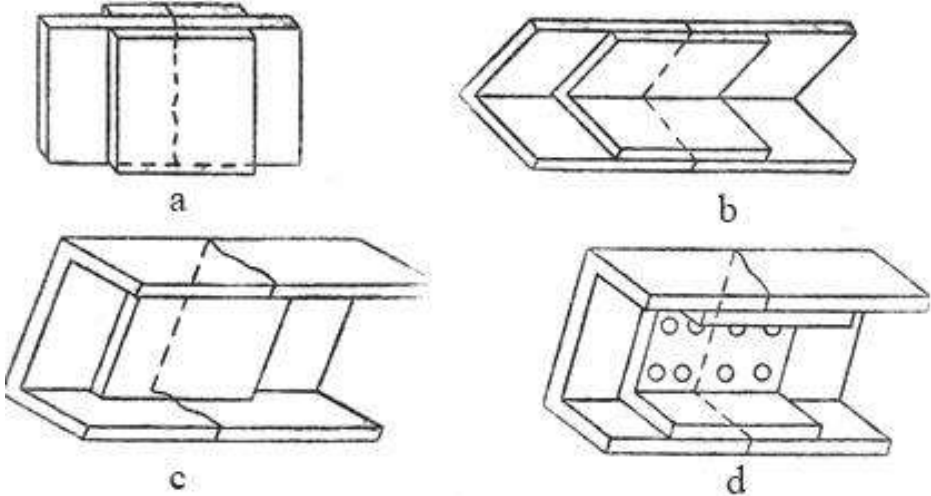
Repair of frame parts with strengthening patch pieces:
